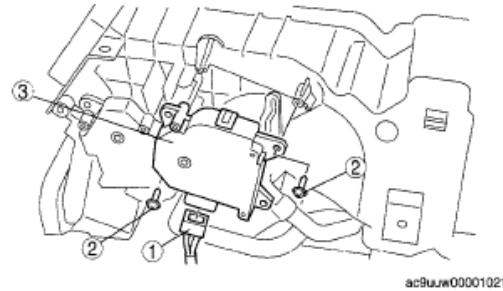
Identifying Rear Air Mix Actuator Removal Order
